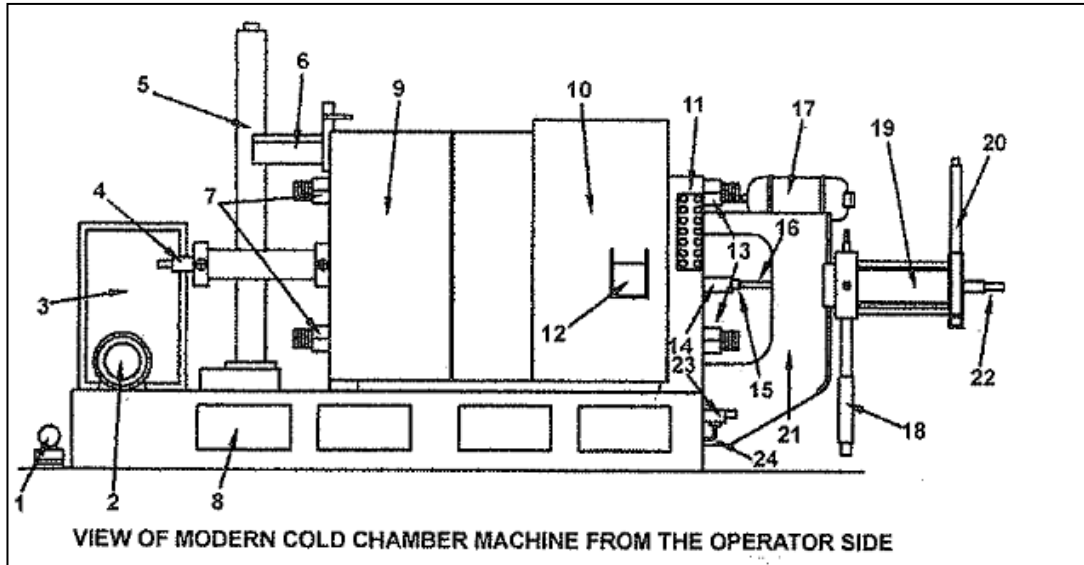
Key Components of Modern Cold Chamber Die Casting Machine from Operator Side [11].
